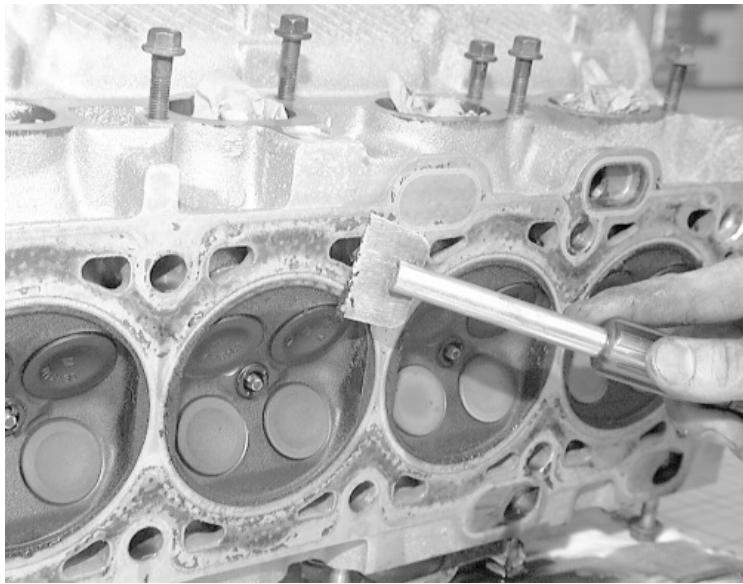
and thoroughly clean the cylinder head
